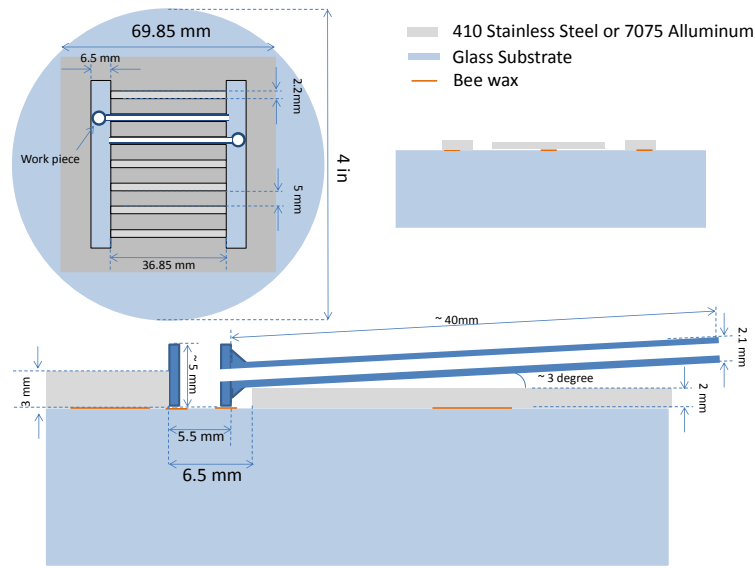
The T-shaped stem pieces hold the holding jig (the gray part) using beeswax. They both hold onto a glass substrate that can be mounted onto the lapping machine.
